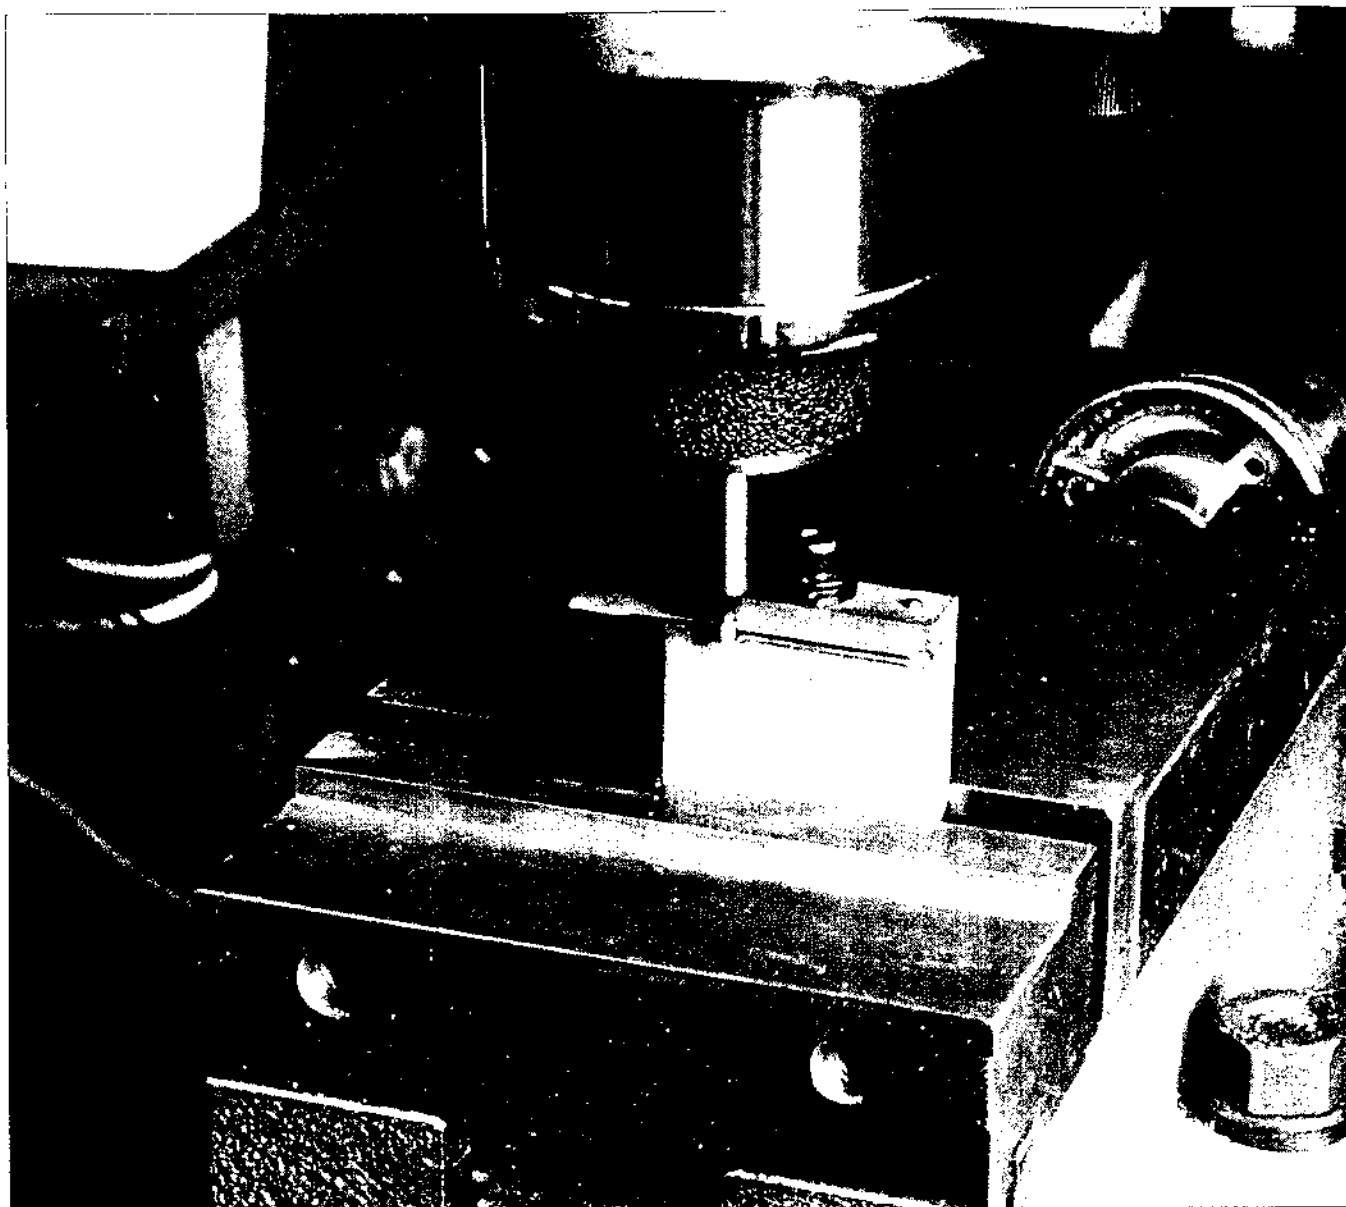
Mill the edges of the spring at 60 degrees using a special holding fixture for a dovetail fit. (See Chapter 9)
